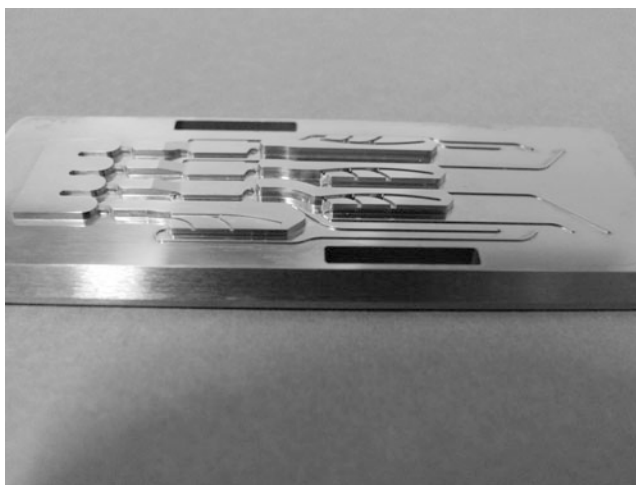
Mold insert for a standardized injection molding tool (microscopy slide size) made with precision mechanical machining
